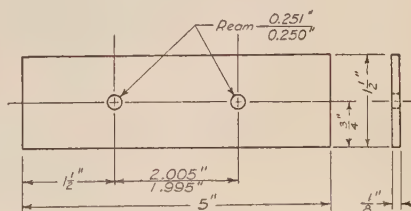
Bearing Specimen for Repeated Load - Set Tests.
